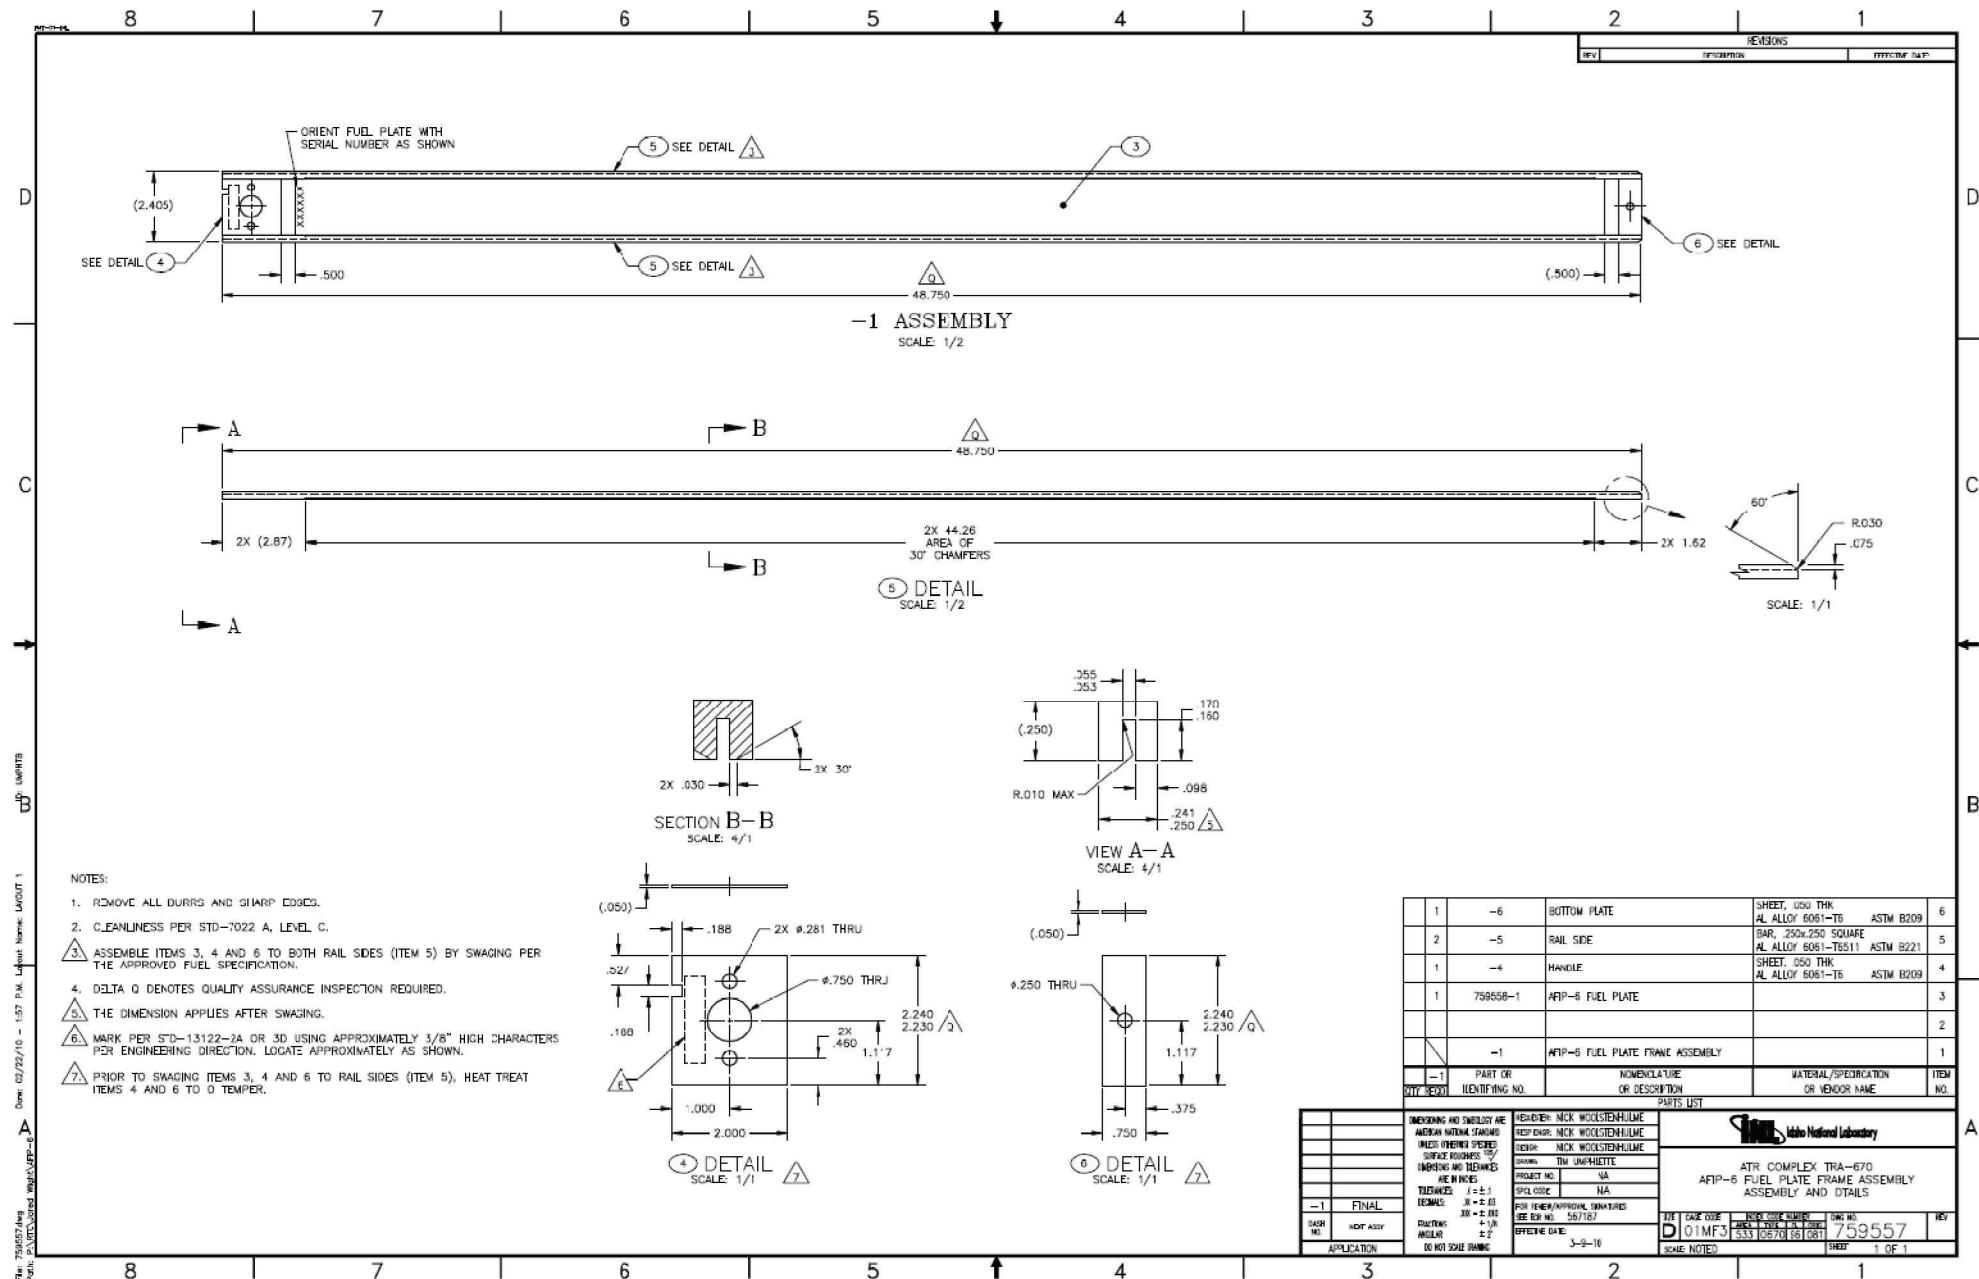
DWG-759557 REV 0 AFIP-6 Frame Assembly.
